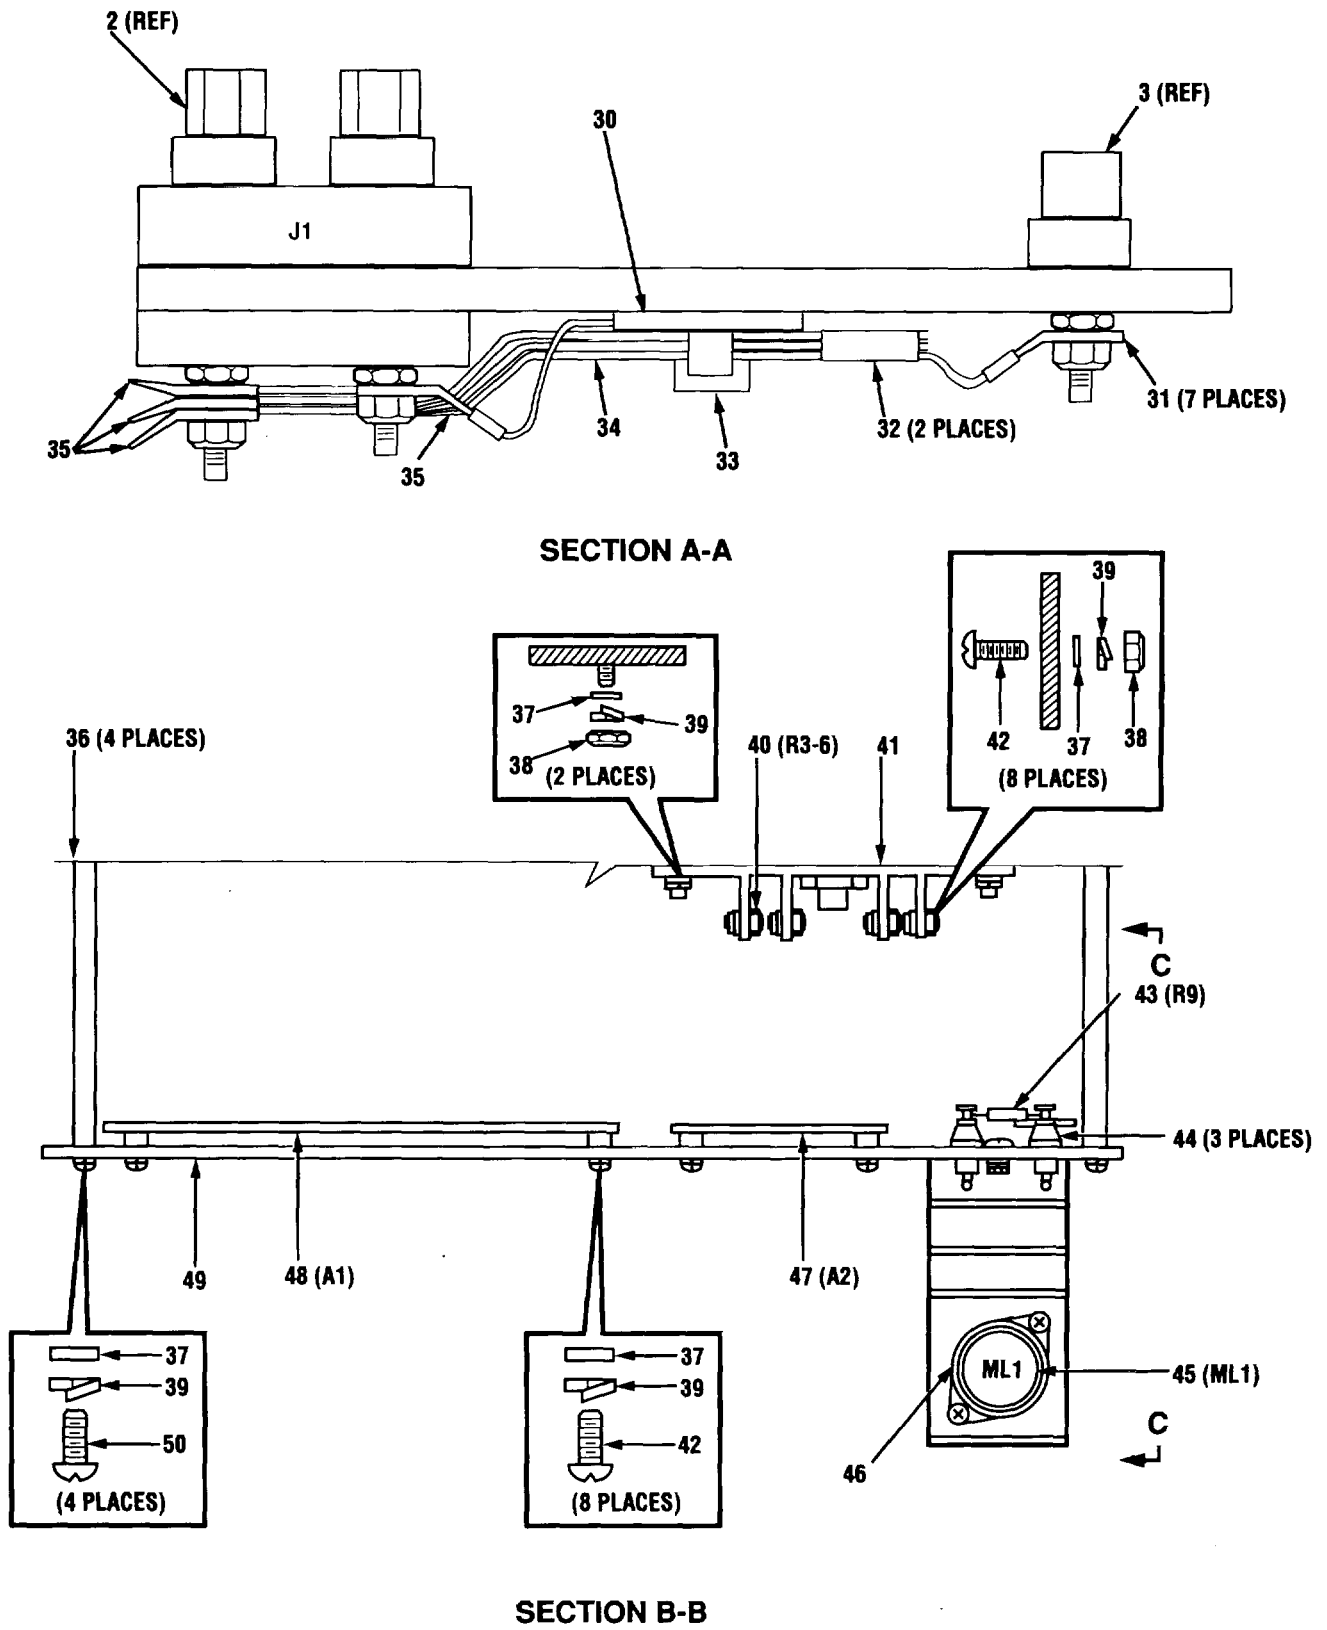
Front Panel Assembly (1-94284.0000//A) (Sheet 3 of 5)
